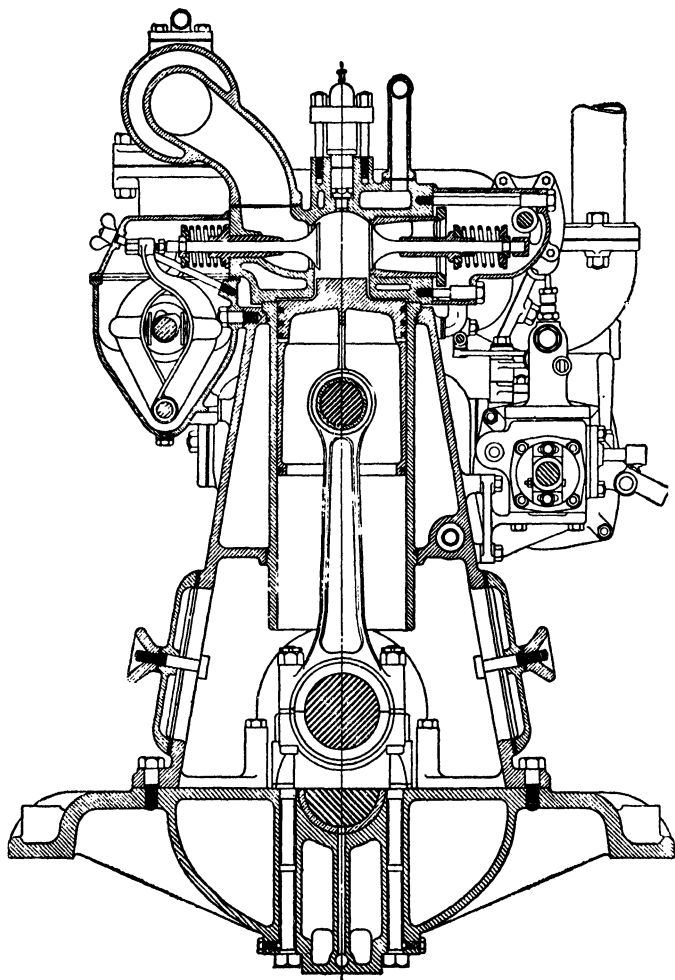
The Gleniffer Heavy-Oil Engine.
